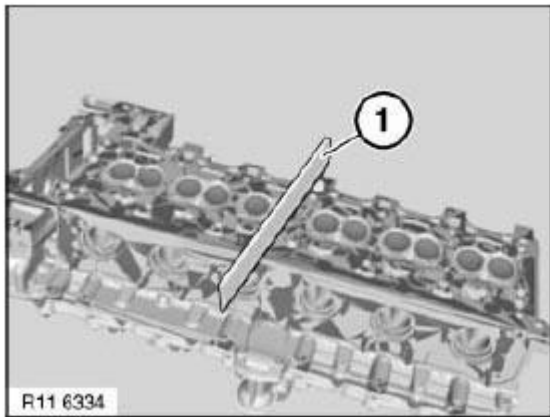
Checking Cylinder Head Sealing Faces Evenness Using Standard Straight-Edge
